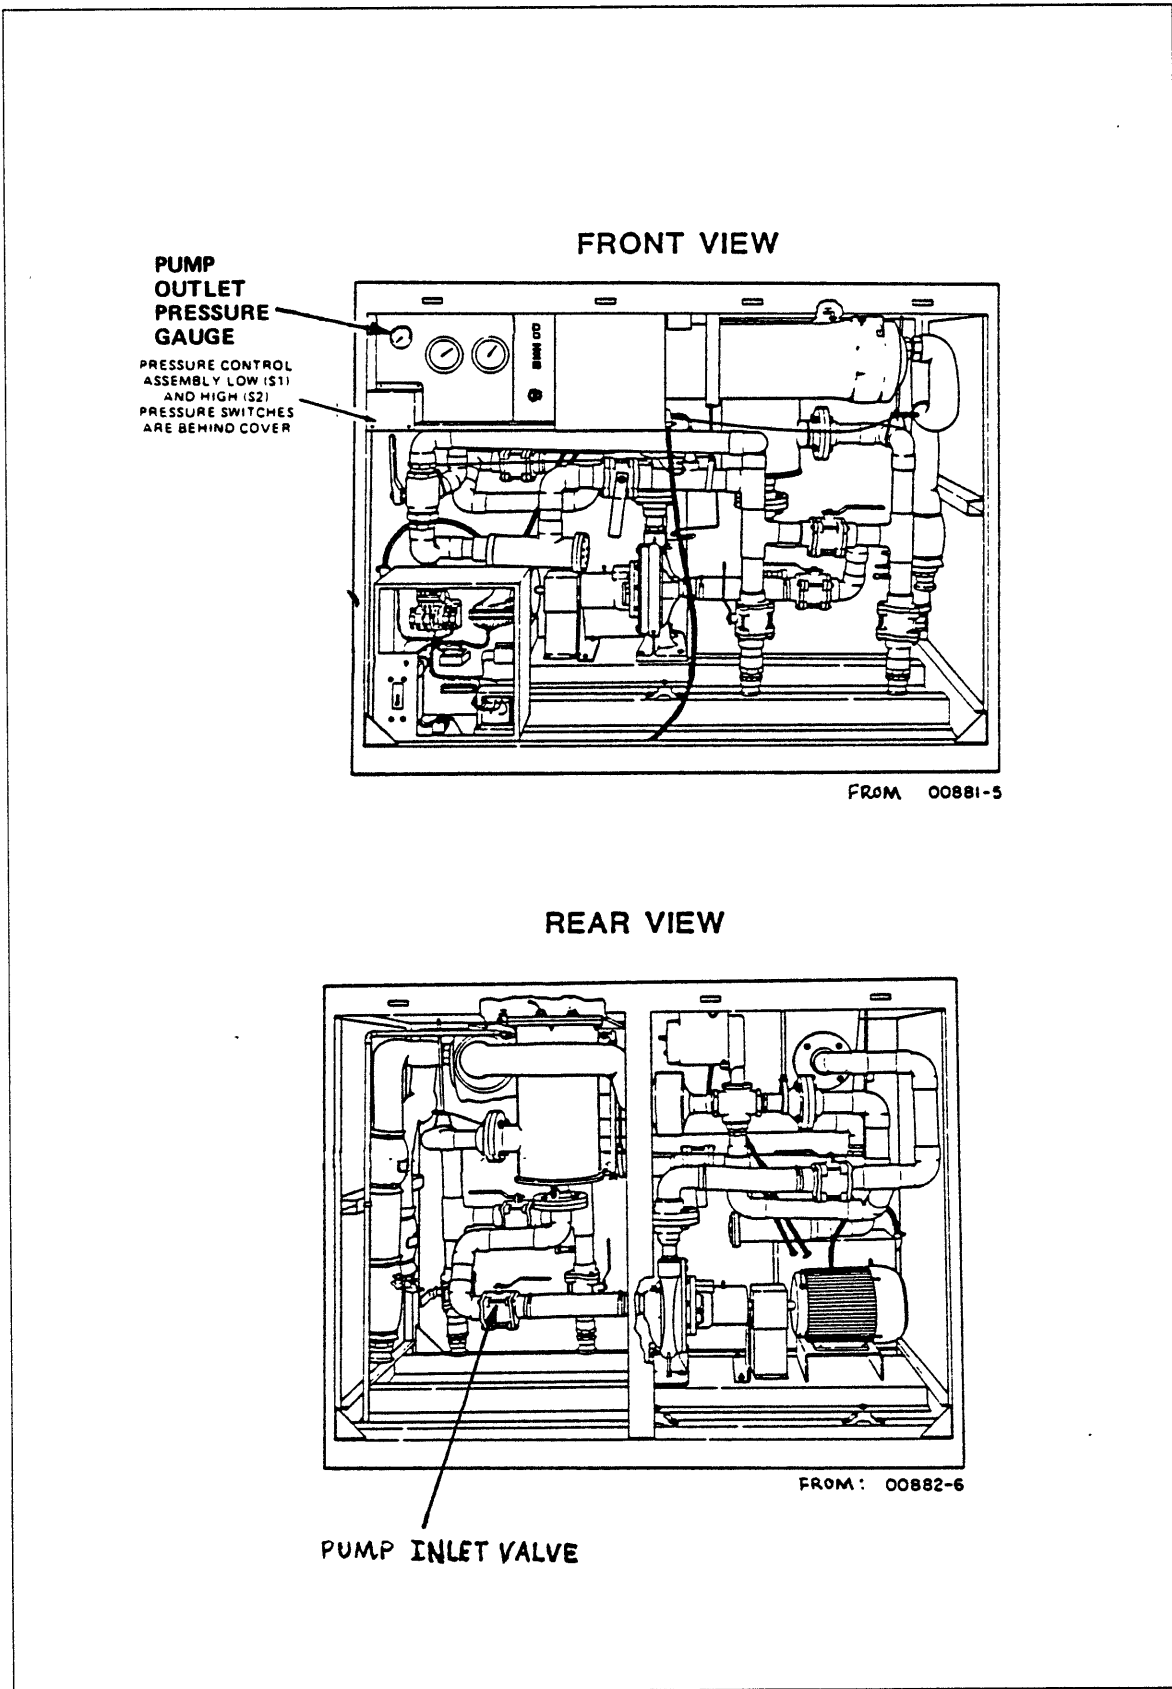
GH252-A Low Pressure Switch Adjustment
